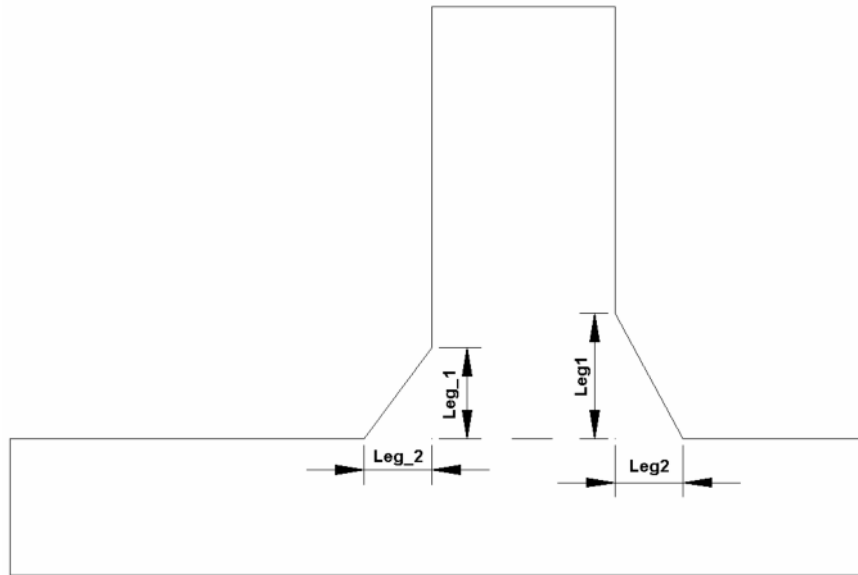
Two Sided Weld Geometry Parameters
